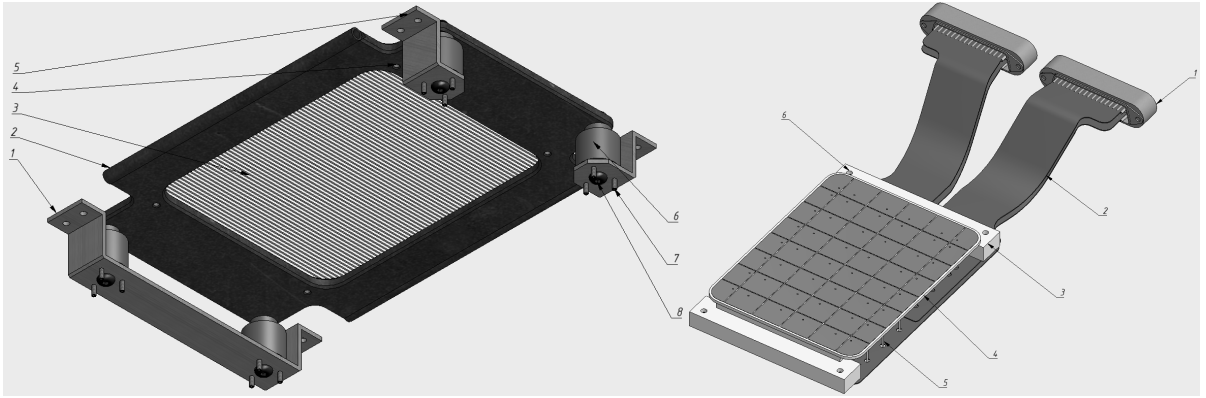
Left: Shielding grid 1 - Front bracket, 2 - Kovar frame, 3 - Tungsten wires, 4 - Connection holes for pad structure, 5 - Rear bracket, 6 - Insulator, 7 - Adjusting screw, 6 - Fixing screw. Right: Pad structure 1 - 50-pin connectors, 2 - Flat cables, 3 - Bar, 4 - Pad plane, 5 - Pin, 6 - Connecting hole
